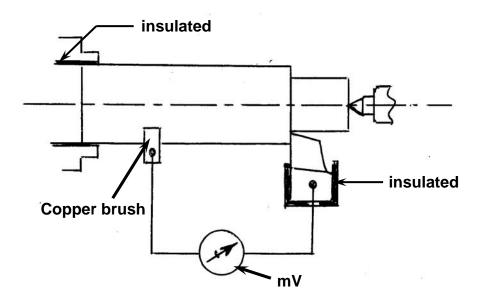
Tool-work thermocouple technique of measuring cutting temperature.
